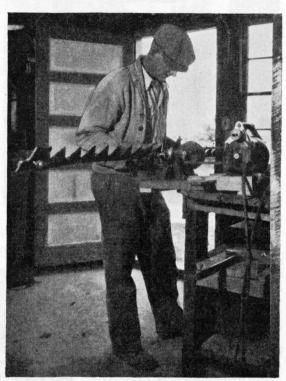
Sharpening mower knives with portable-motor grinding rig
